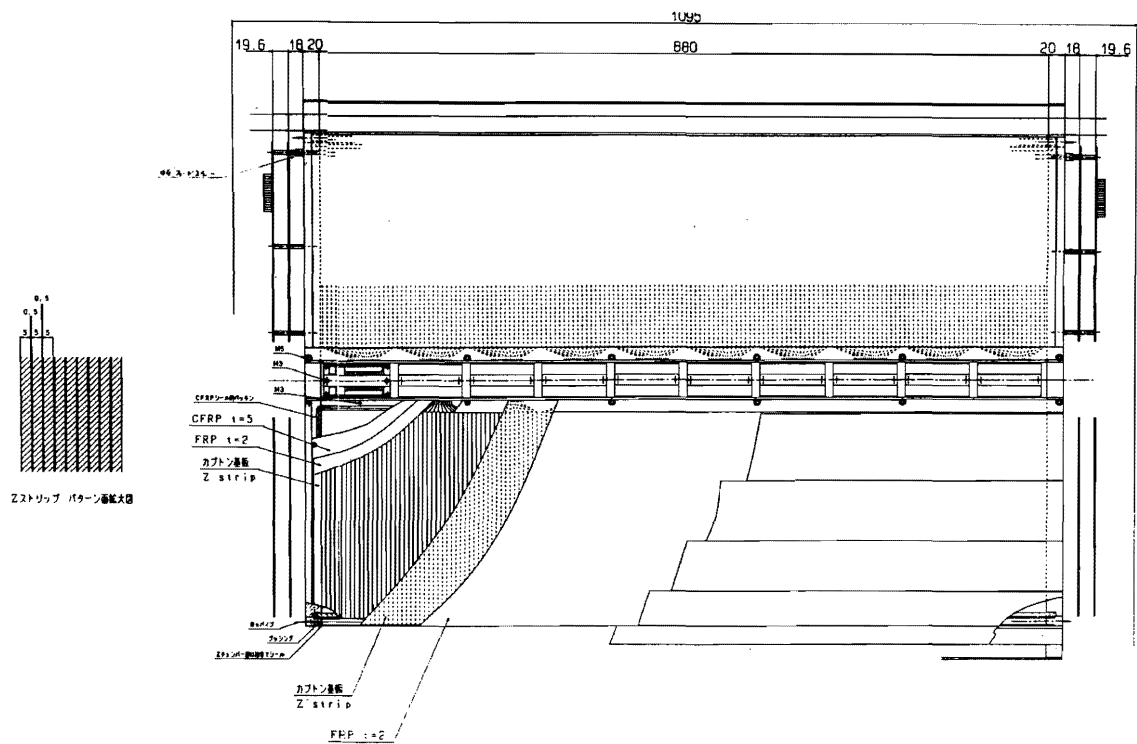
A drawing of the CDC & Z-chamber (the side view)
